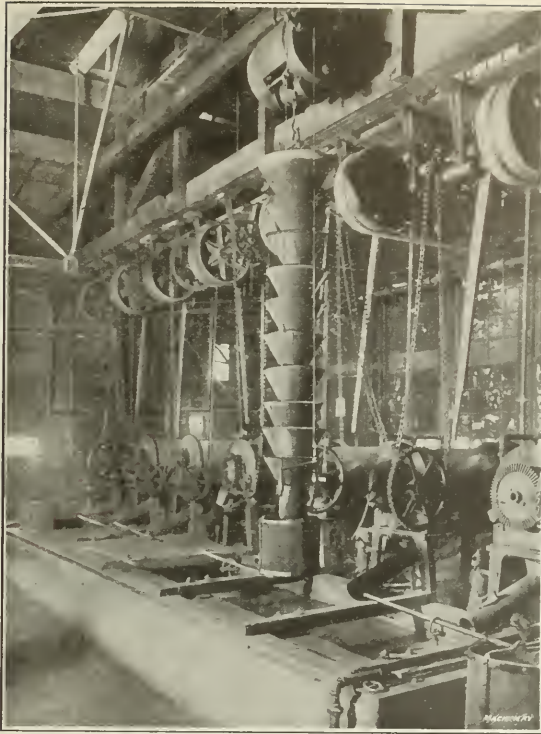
Discharge End of American Rotary Gas Furnaces, showing Quenching Tanks and Deflector through which Balls are delivered to Baskets at Bottom of Tanks
